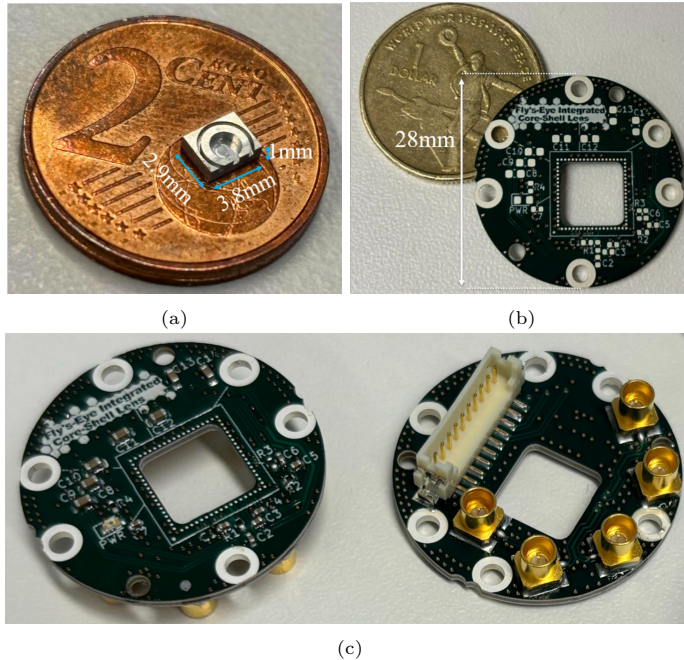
(a) CNC machined aluminum back-reflector. (b) Fabricated Ag-finished PCB before assembly and (c) the PCB after fully assembled.
